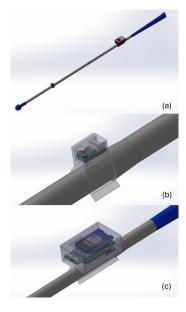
CAD model of the smart cane. (a) Full assembly with sensor modules and ergonomic handle. (b) Enclosure for the ToF sensor and circuit, mounted near the base. (c) Main housing for the ESP8266 D1 Mini near the handle.
